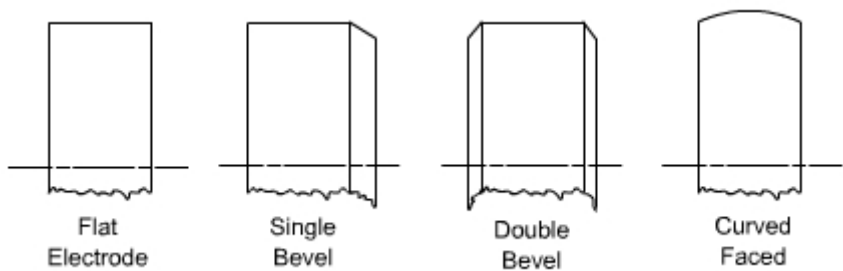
Electrode Shapes of Seam Welding
